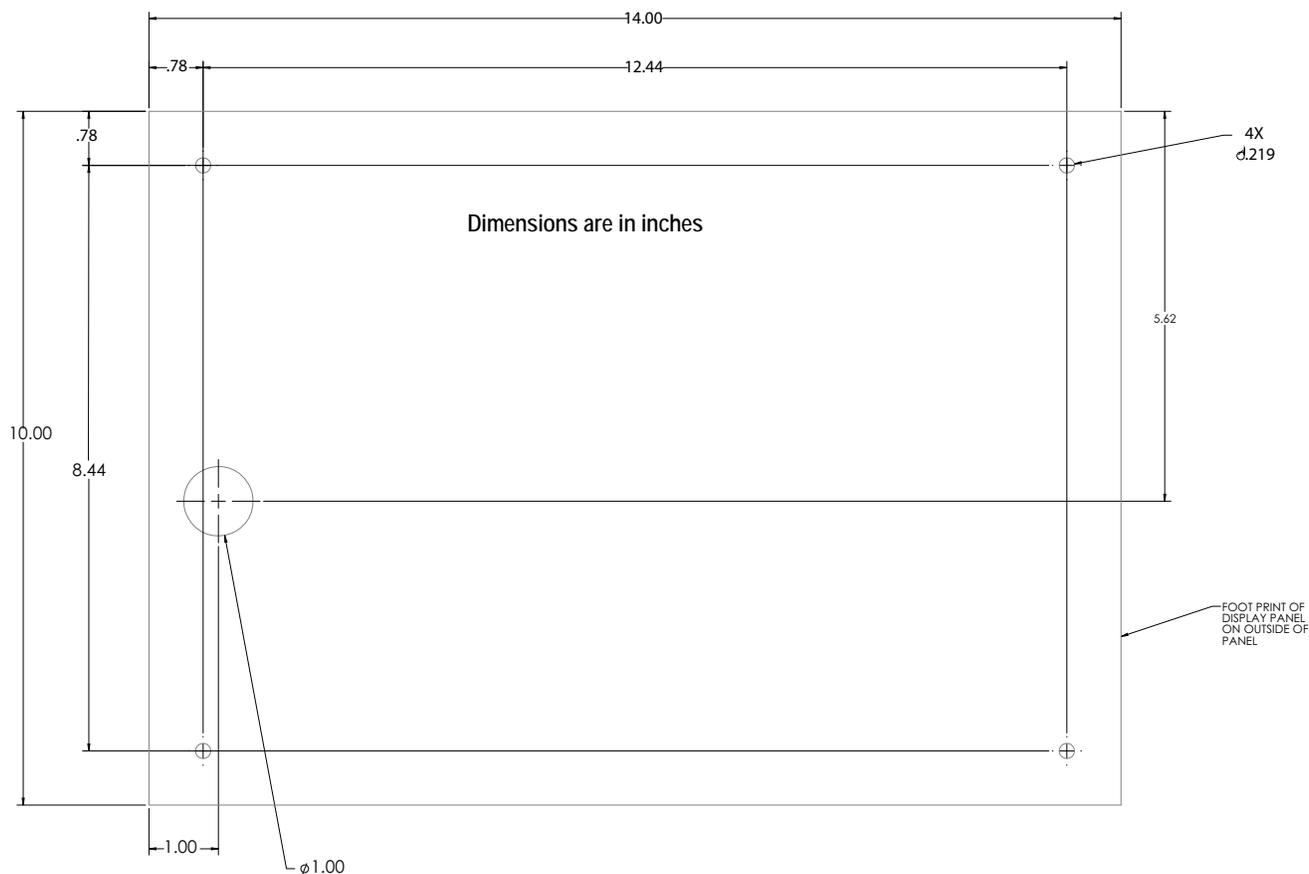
12 Inch Touch Only Panel Mount Dimensions
